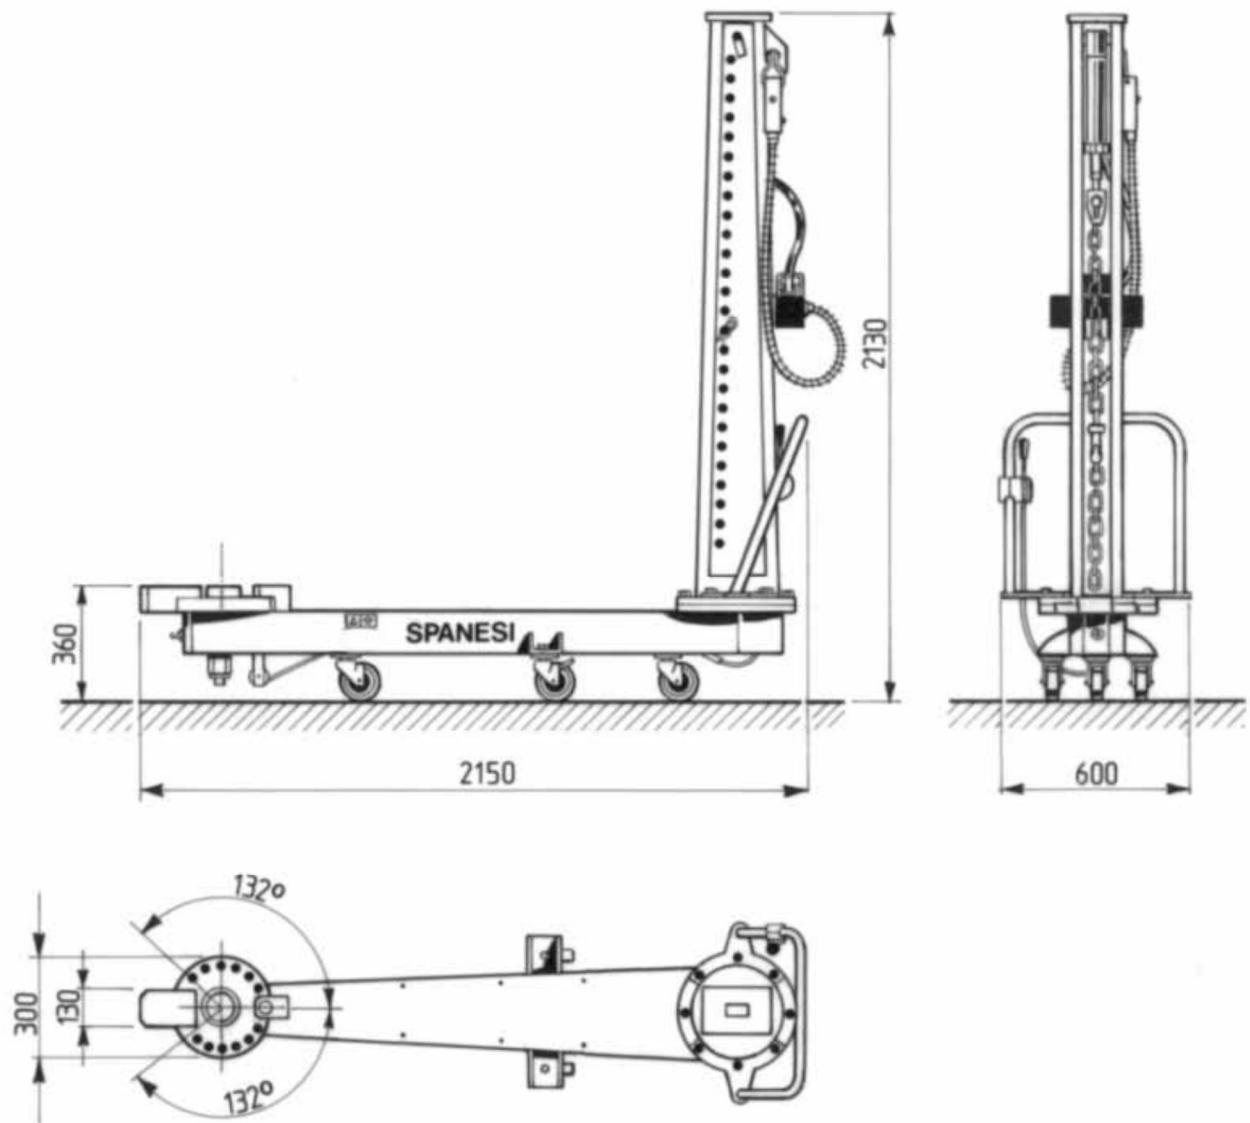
ADJUSTABLE PULL ARM DIMENSIONS
